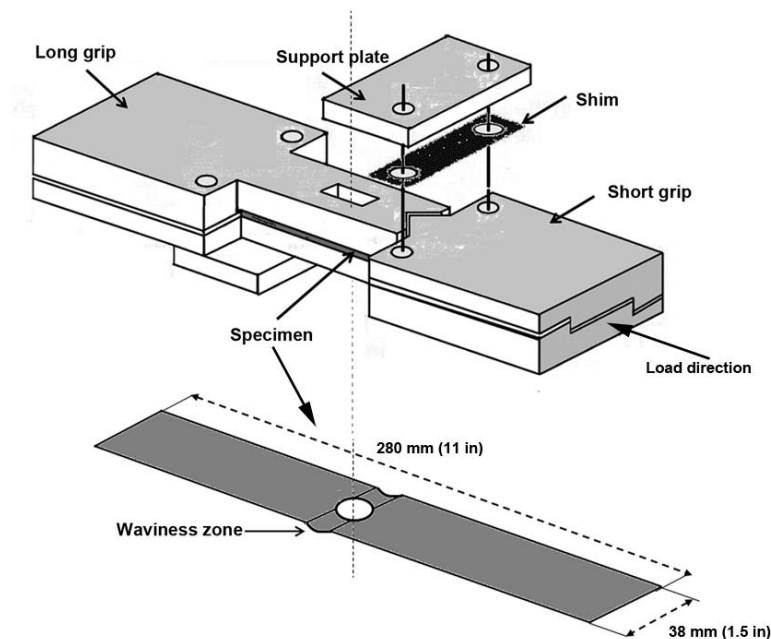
Schematic of the open-hole compression specimen and test fixture[138]
